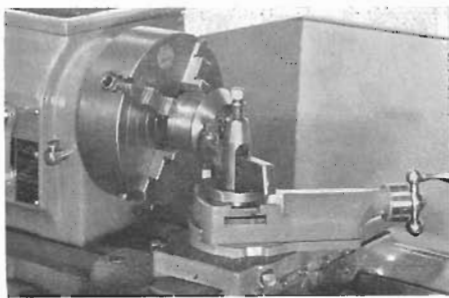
Turning a Bevel Gear Blank with the Compound Rest
